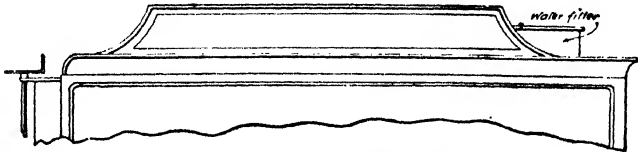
G.C.R. Sheet-metal Coal Guard.
